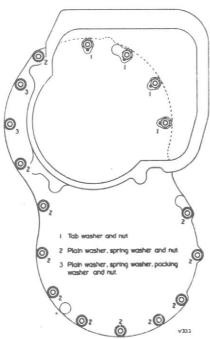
Positioning of nuts and washers securing the valve box mounting plate
